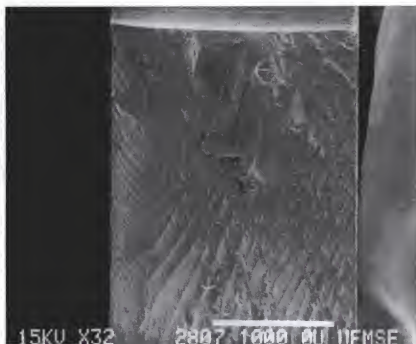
Fracture surface of a double-notched specimen tested at 2×10^{-5} mm/sec.
